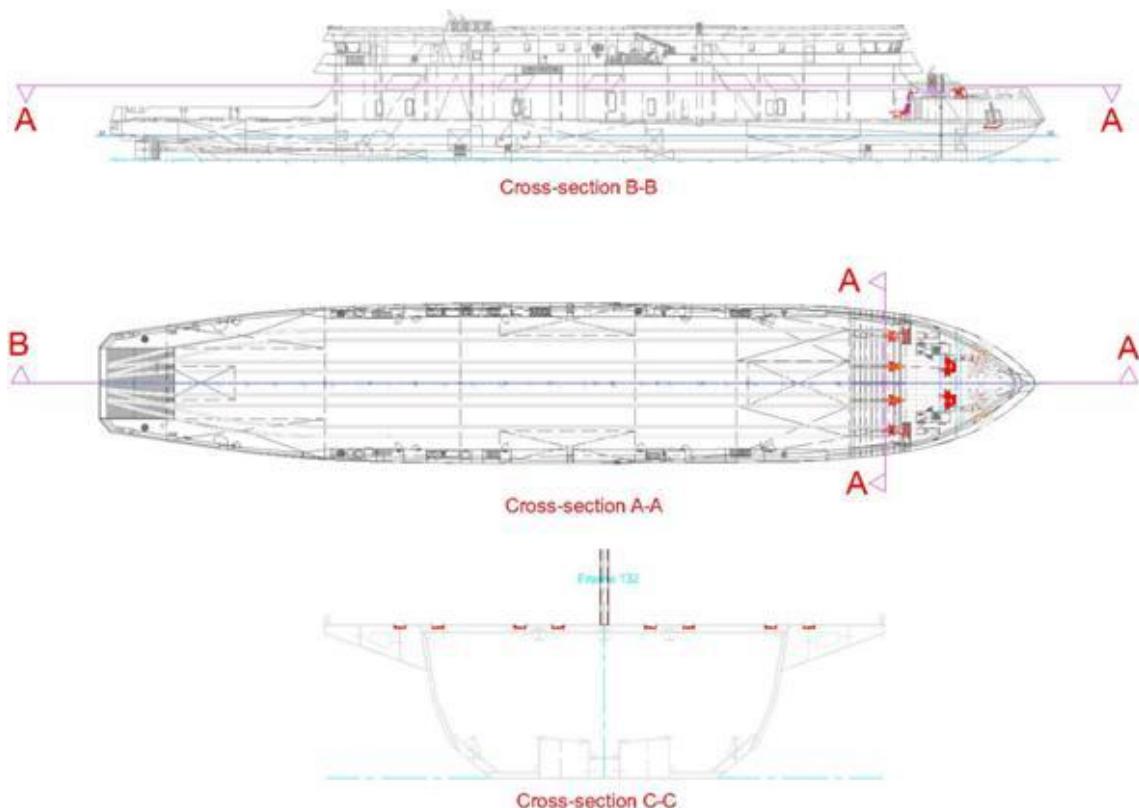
General layout plan for MV Uhuru II wagon ferry
